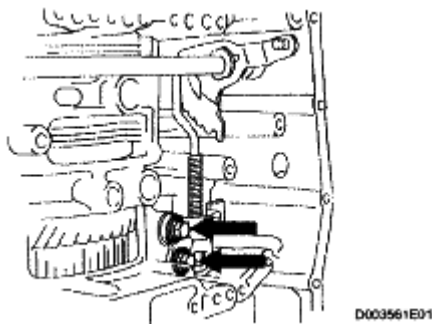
Locating Parking Lock Pawl Bracket And Bolts
